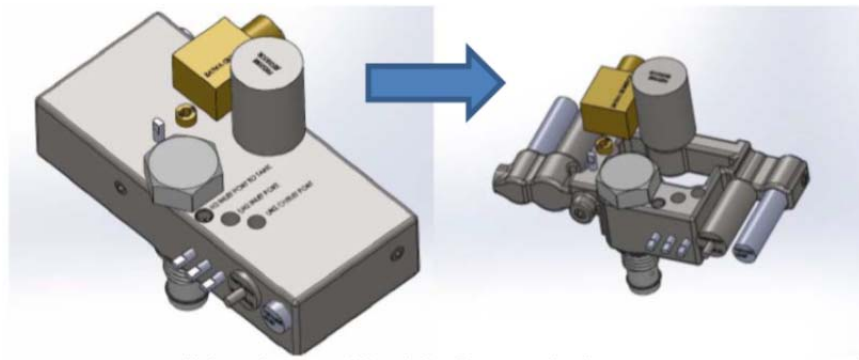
Consolidated Valve Block Before and After Removal of Unnecessary Material. This version was designed to be installed on top of the tank.
